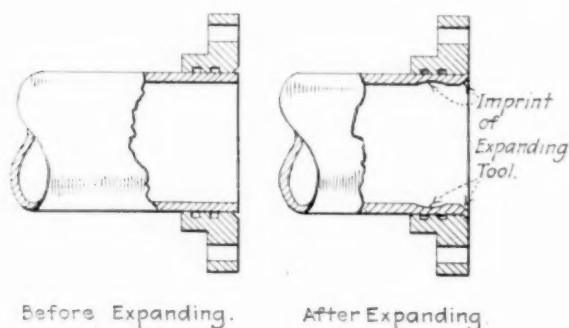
METHOD OF EXPANDING PIPE INTO FLANGE
